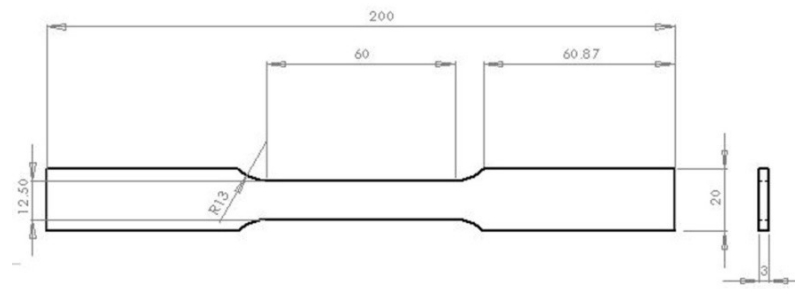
Dimensions of tensile test sample and welded and unwelded tensile test specimens.
